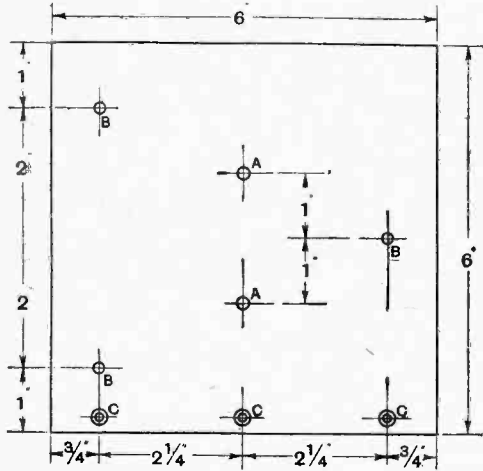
The panel layout. Drilling sizes are: A, 3/16in.; B, 5/32in.; C, 1/8in.; countersunk.
